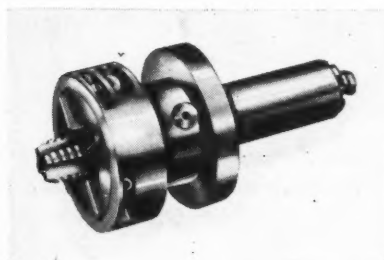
Eastern Die-head for Use on Pipe-threading Machines and Turret Lathes
